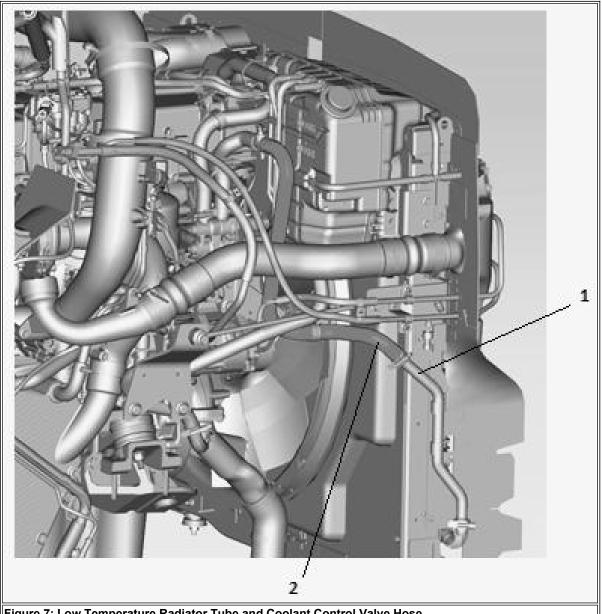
Low Temperature Radiator Tube and Coolant Control Valve Hose
